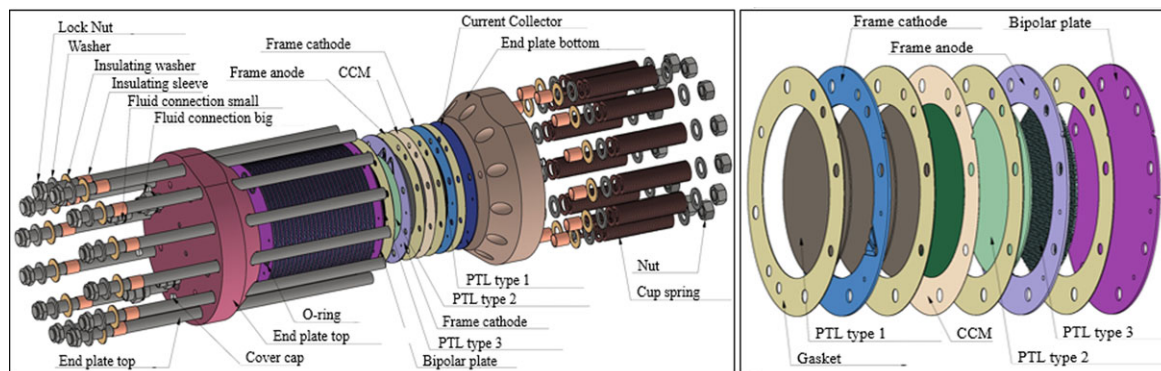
Exploded view of the reference PEM stack (left) and of a single cell (right)
